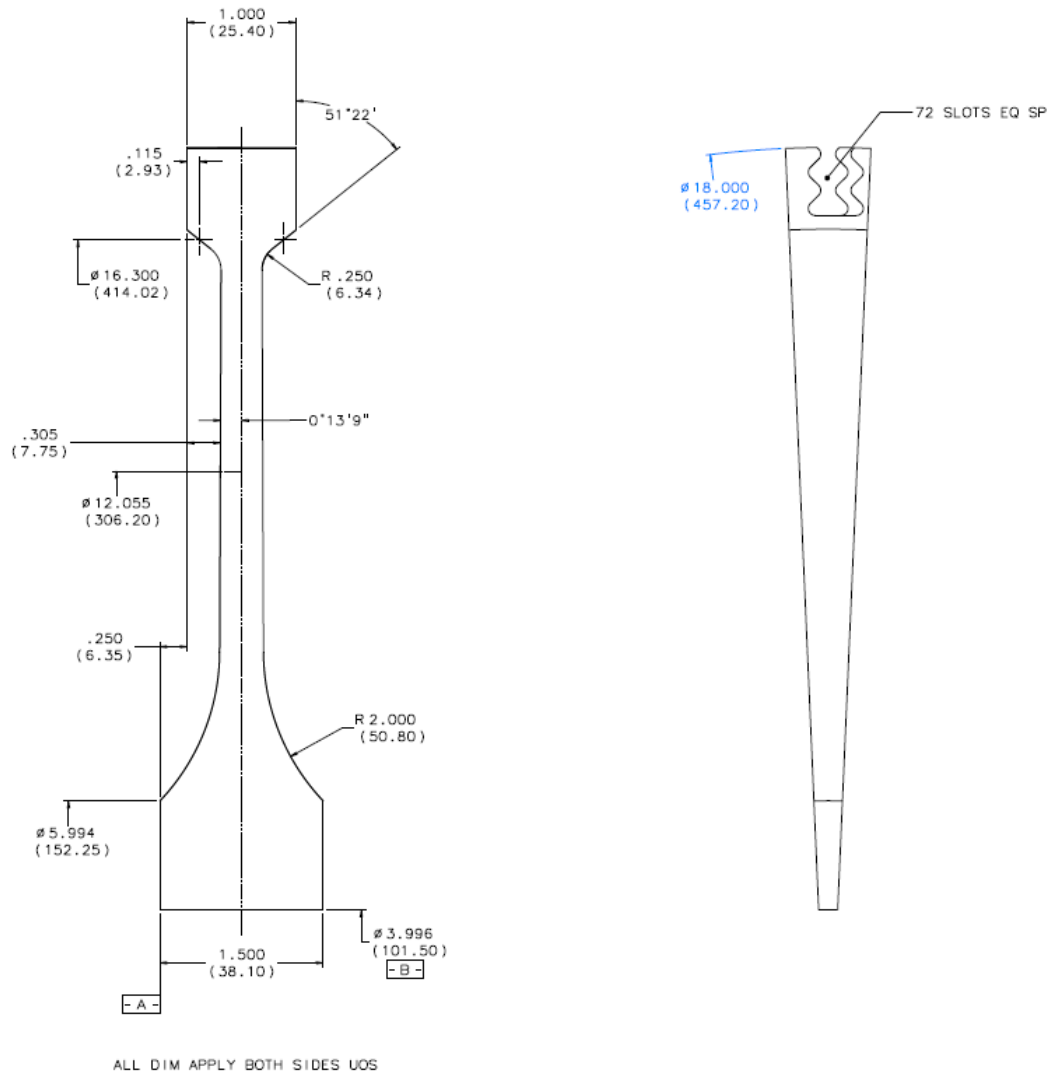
Test Case Geometry Definition: Disk Axisymmetric Profile in Inches and (Millimeters)
